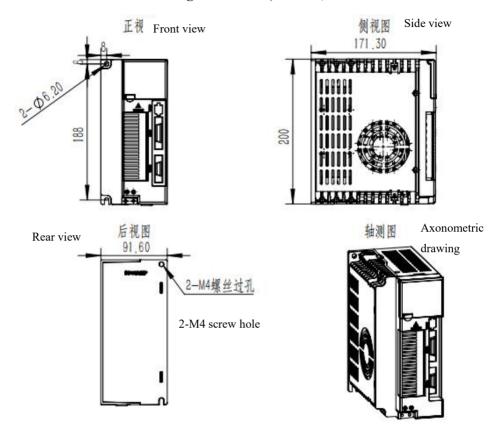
10A/22A/32A appearance dimension diagram
